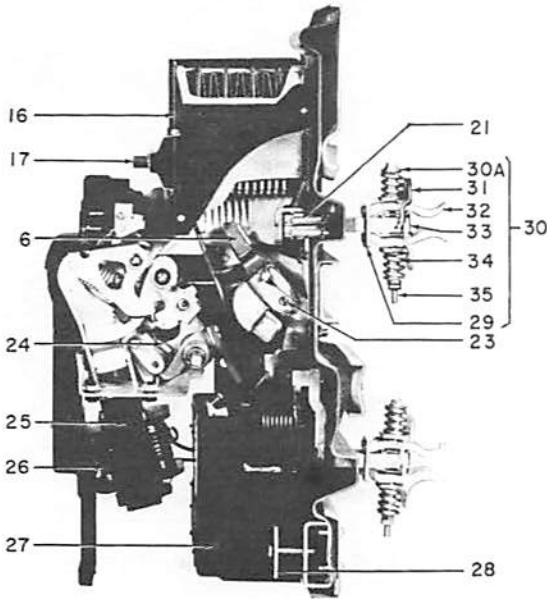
Cutaway view of type AK-2-25 electrically operated power circuit breaker
